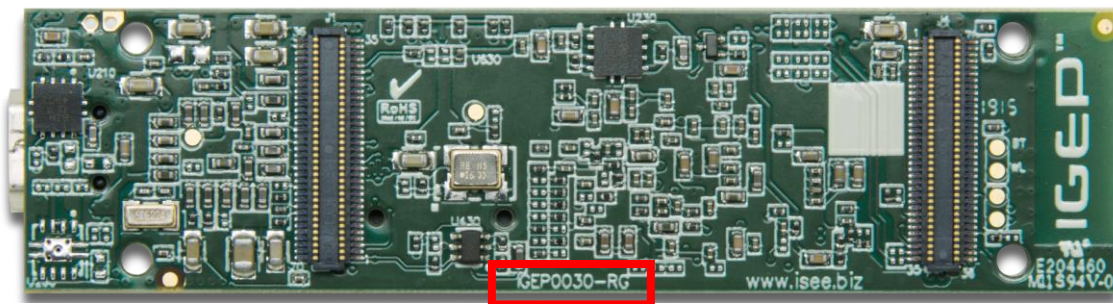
IGEP™ COM MODULE DM3730 RG version board bottom side components
